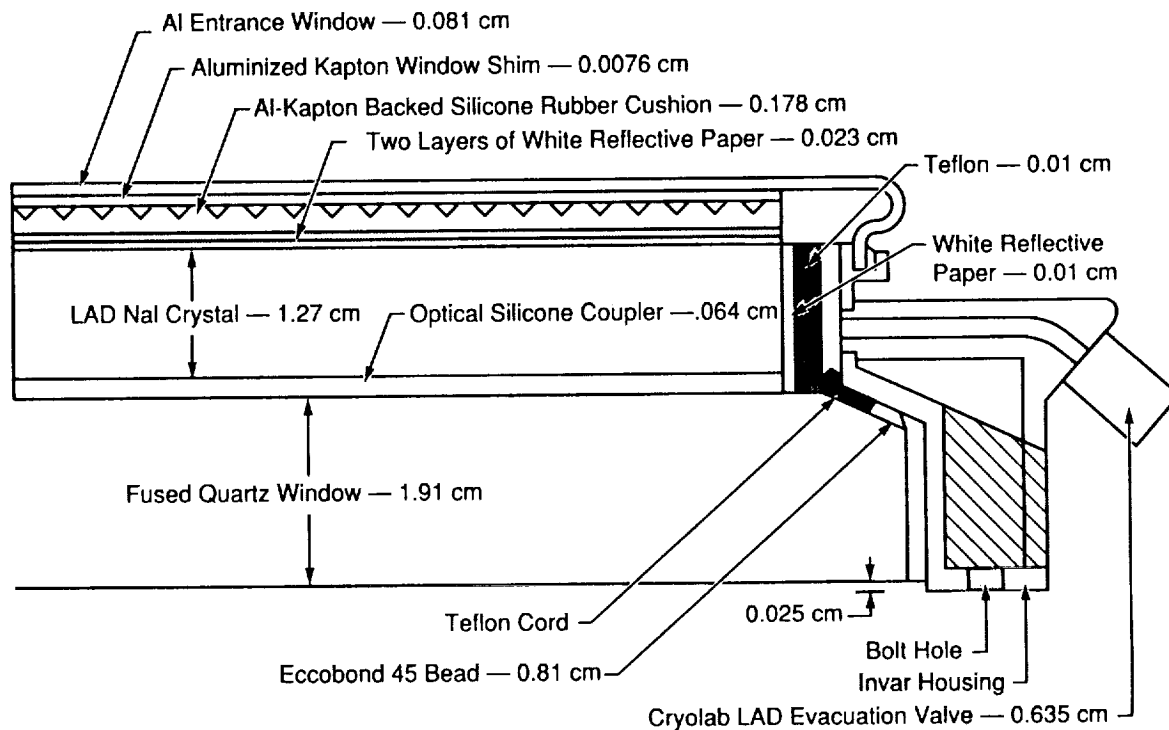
BATSE Large Area Detector Assembly (Cross-Section).
